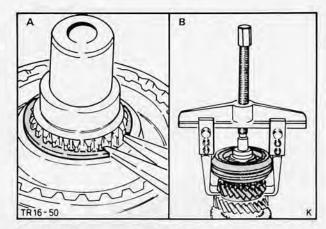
A – Remove circlip of 3rd/4th gear synchroniser hub B – Remove 3rd/4th gear synchroniser hub and 3rd
